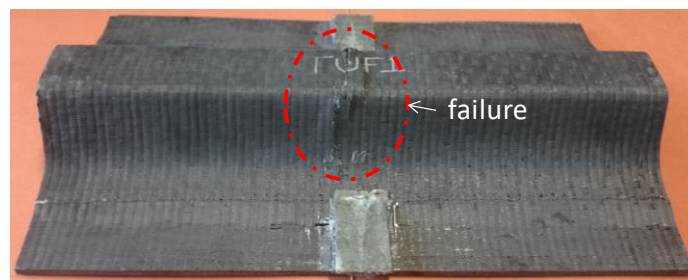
Typical damage found to all configuration of specimens (failure on the top of stiffener).
